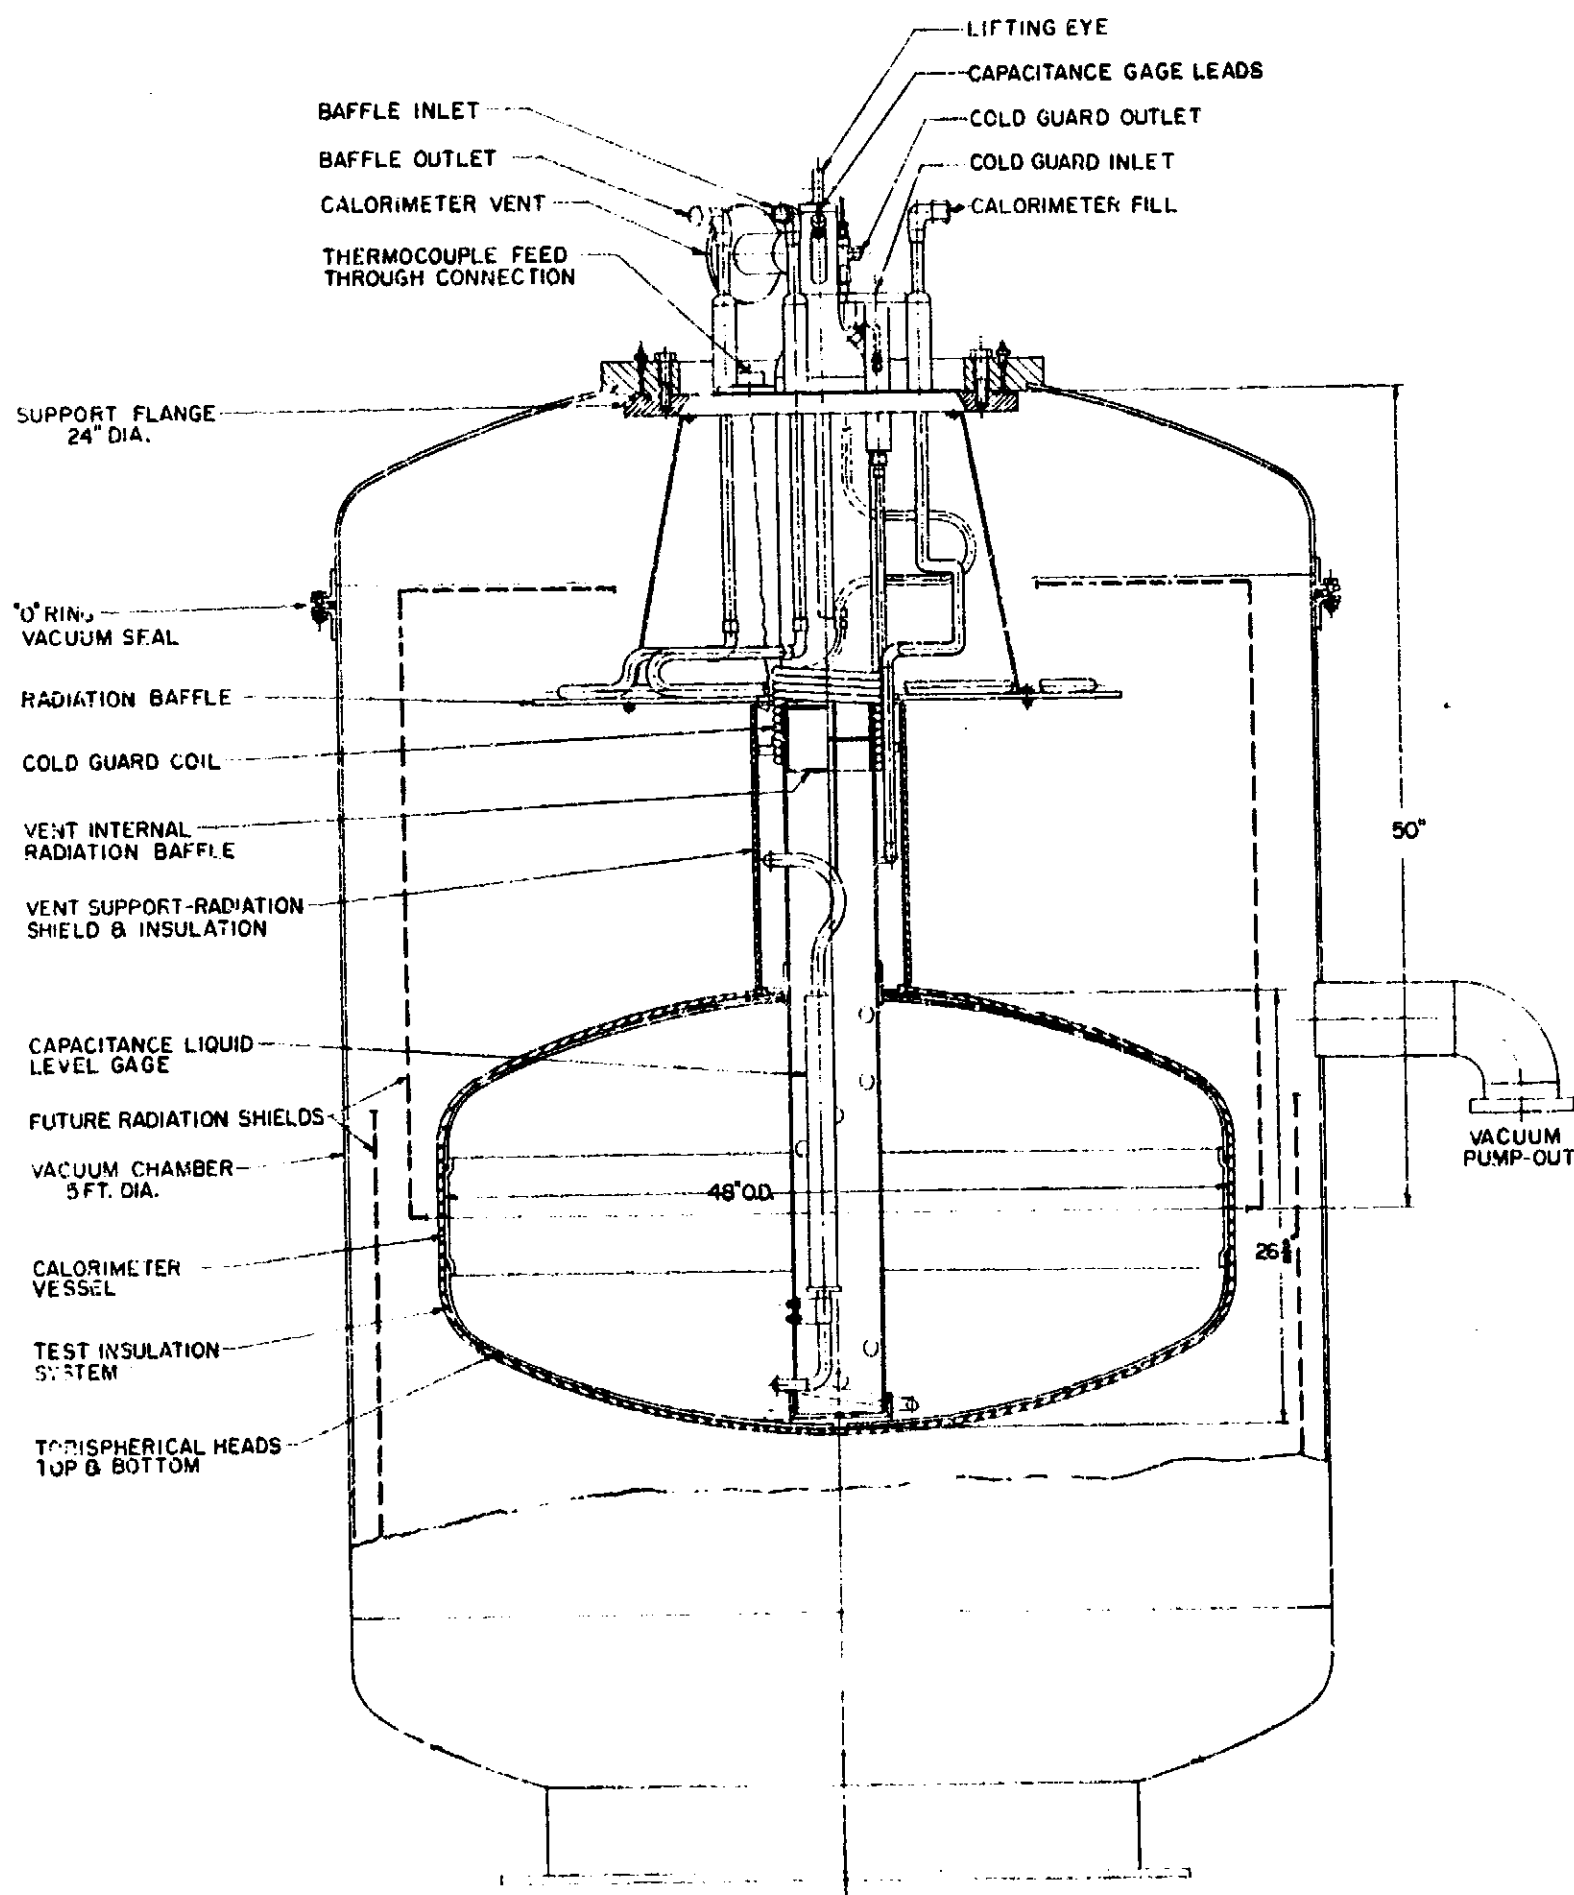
CHAMBER AND CALORIMETER ASSEMBLY
